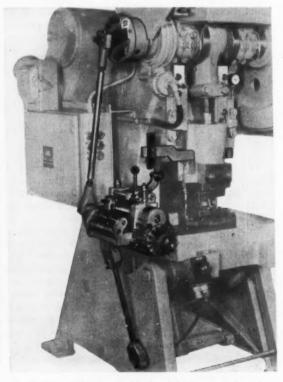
Cooper Weymouth 6-inch roll feed mounted on press
